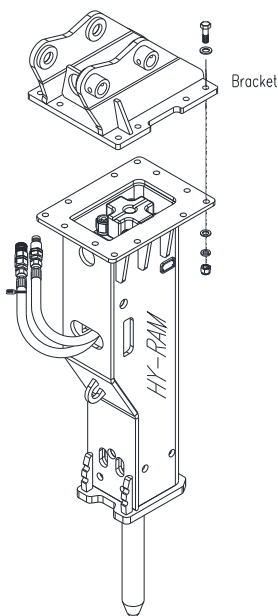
Housing Box, Mounting Bracket & Bolt Set
